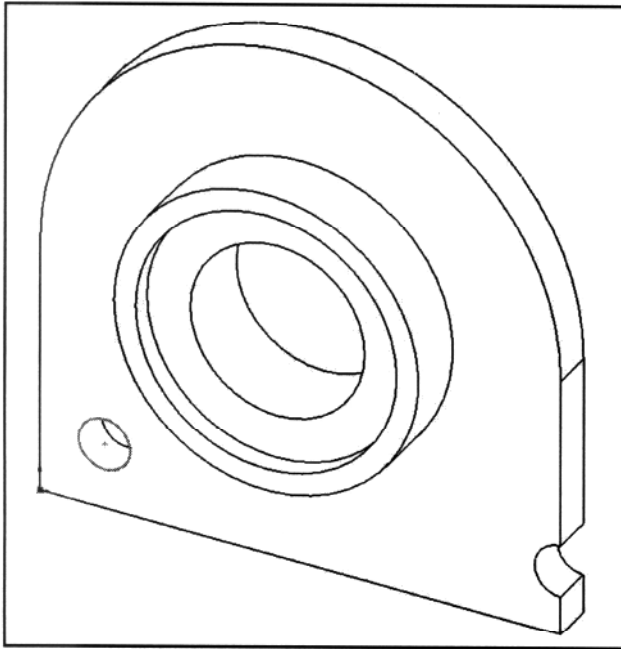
The retainer model after changing the horizontal locating dimension for the right hole.
